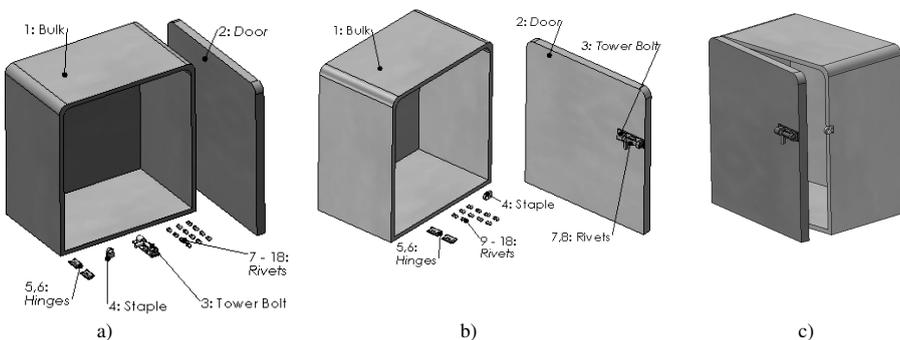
a: Initial State of components before Assembly b: After the first step of assembly — attaching the Tower Bolt to the Door c: Final Assembly.
